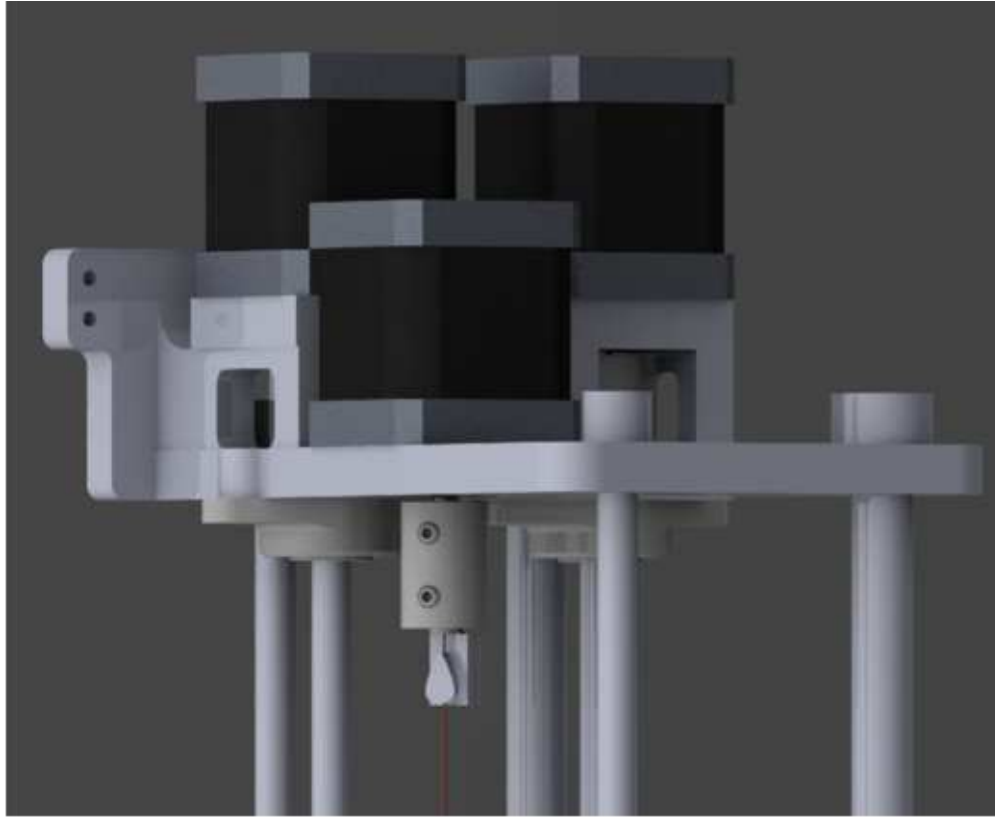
CAD model of the top portion of the five motor CNC controlled TCA manufacturing machine.
